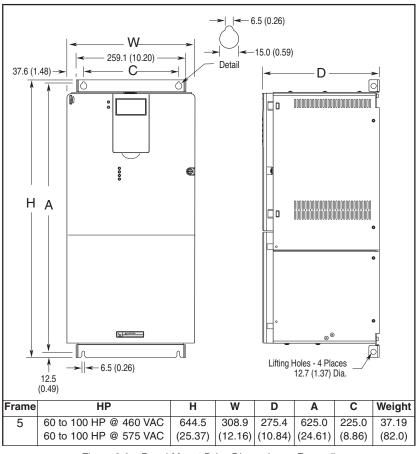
Panel-Mount Drive Dimensions - Frame 5
